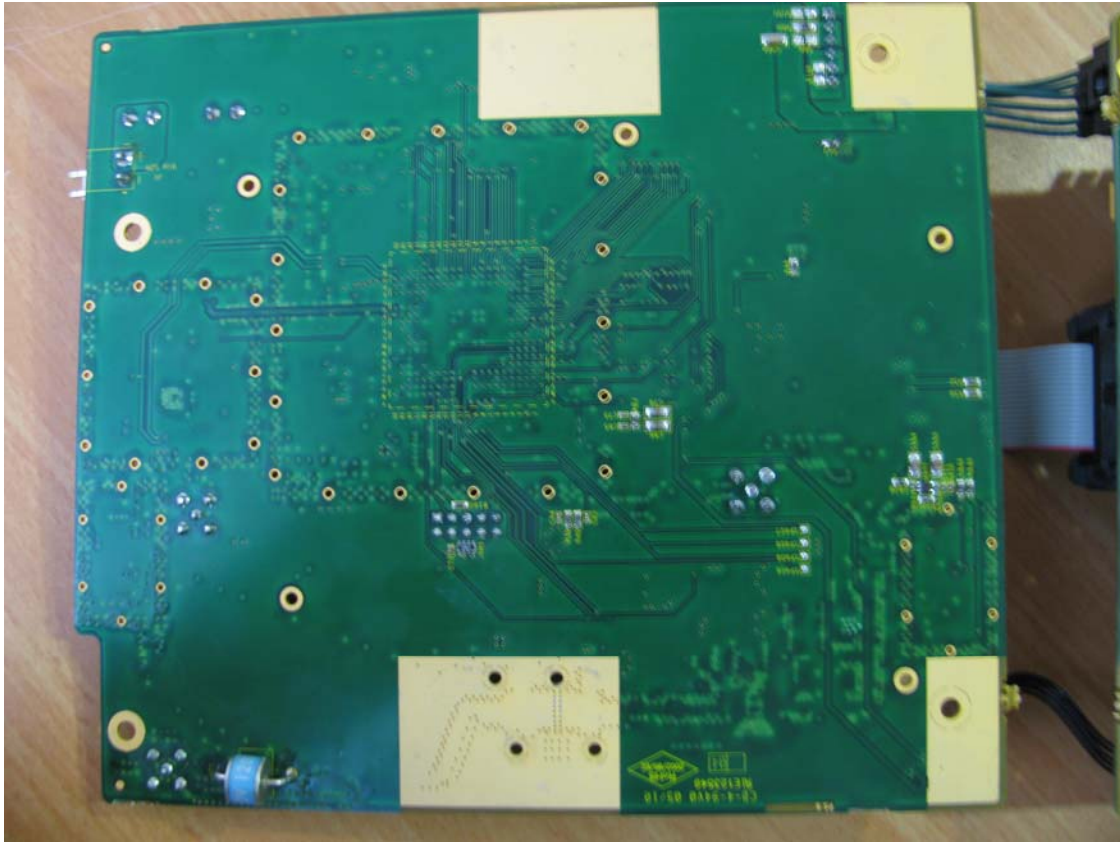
RF of 700 MHz radio & Mother board PCB - PS
